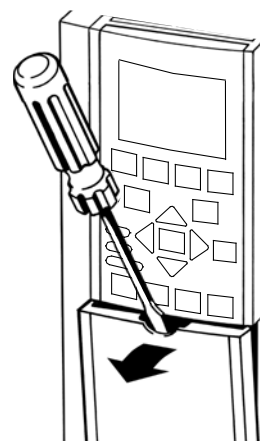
Control Wiring Access for IP20/Open Chassis Enclosures
